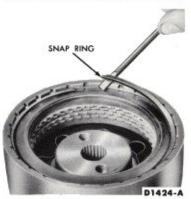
Forward Clutch Pressure Plate Snap Ring Removal or Installation
